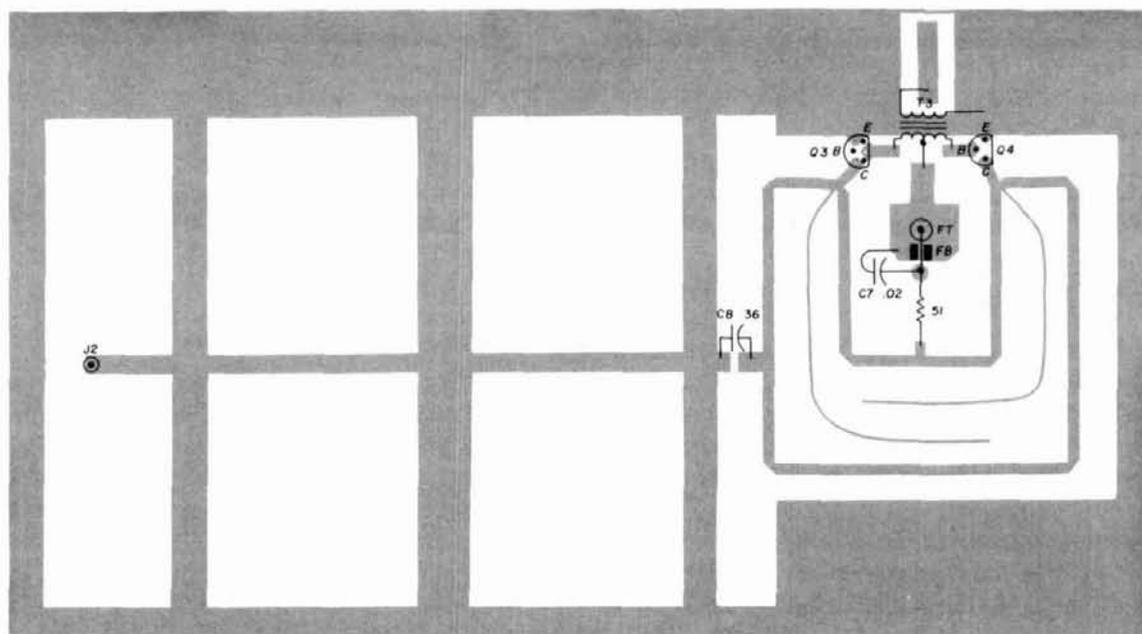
Component placement on the 1152-MHz tripler/filter board. Foil layout is shown in fig. 4. Contrary to other component placement diagrams, this diagram is shown from the etched side of the board.
